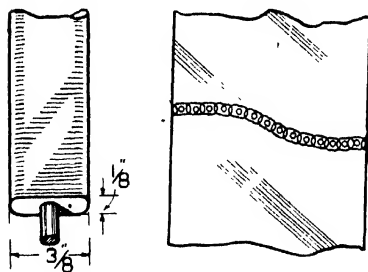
PUNCH-TYPE NIBBLER TOOL FOR CUTTING METAL FROM 16- TO 10-GAUGE THICKNESS
